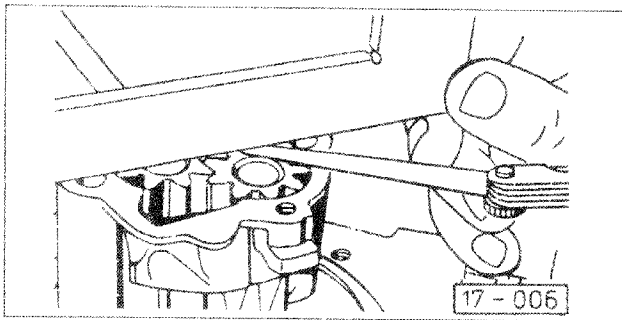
Oil pump gear axial play being measured using straight-edge and feeler gauge.
